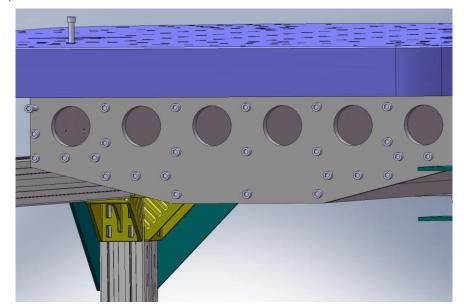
Bolt End Caps to both ends of the Stiffener Assembly.
